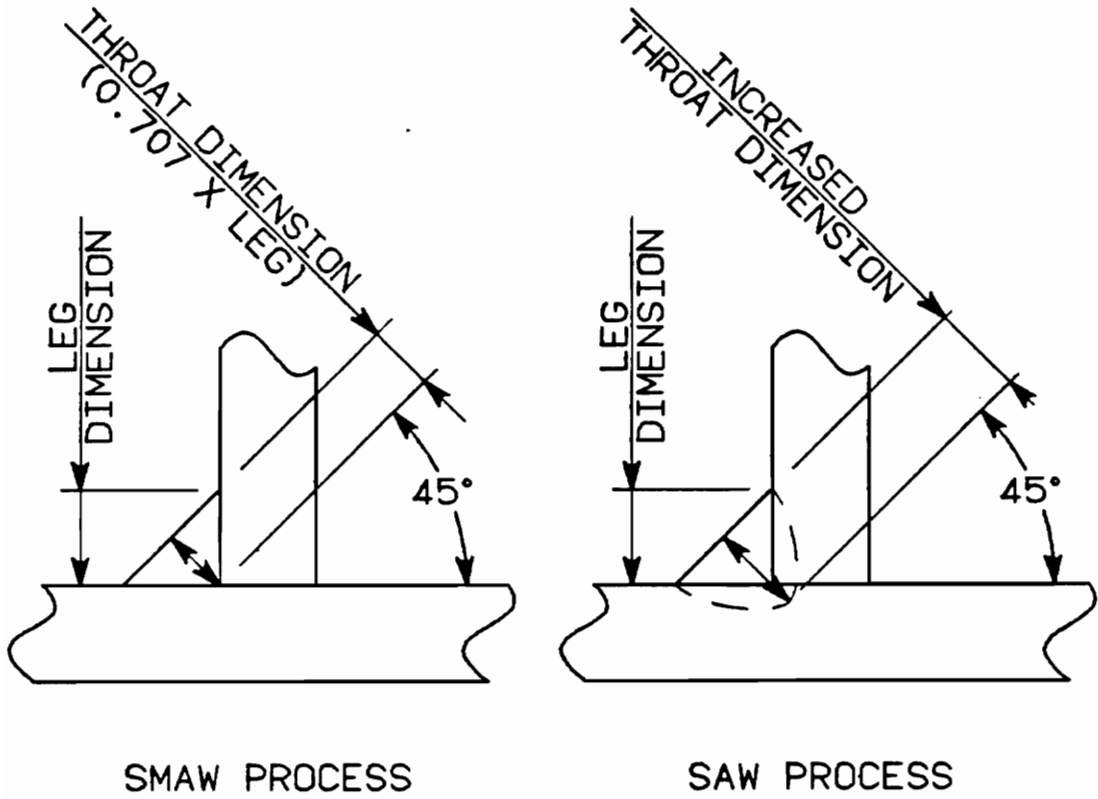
Diagrams Showing Increased Penetration of SAW over SMAW for Fillet Welds.
